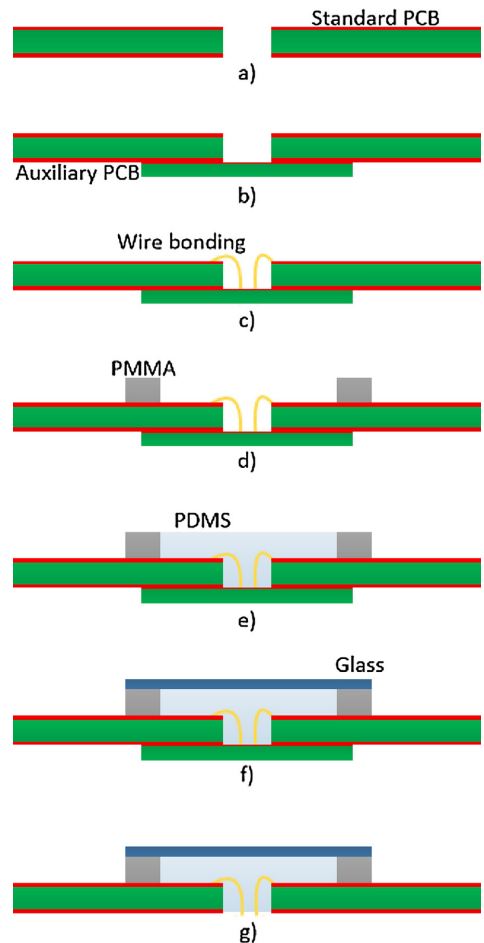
Steps of the fabrication process, using the wire bonding technique: (a) commercial PCB of FR4 and copper; (b) an auxiliary PCB is bonded to the commercial PCB; (c) gold microelectrodes with a diameter of 25 μm are placed using the wire bonding technique; (d) a frame of PMMA surrounds the gold microelectrodes; (e) the gold microelectrodes cavity is filled with PDMS, embedding them; (f) a glass coverslip is placed over the PDMS; (g) once the PDMS is cured, the auxiliary PCB is released.
